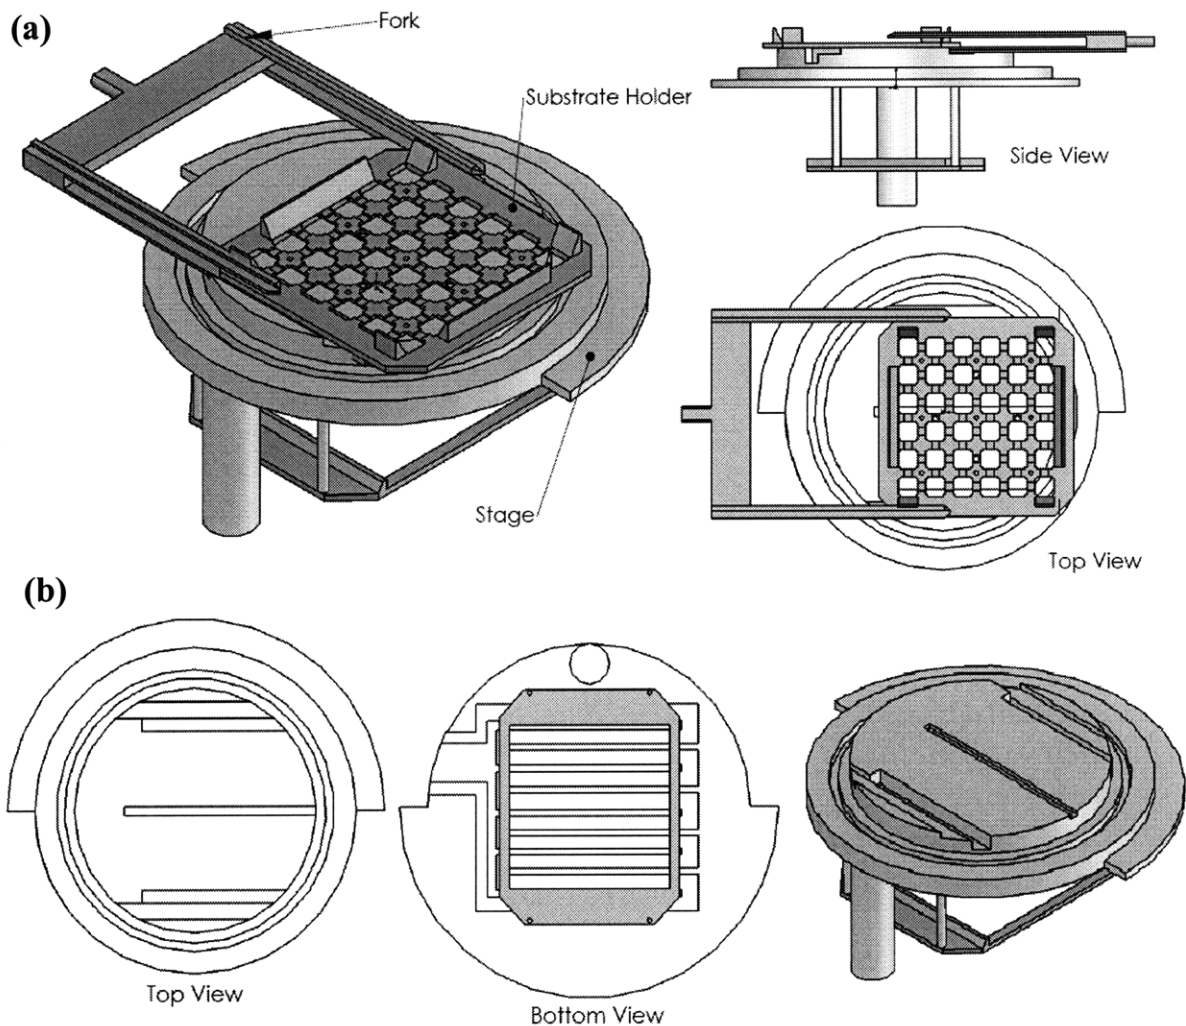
Schematic drawing of sample holder alignment onto the stage: (a) upper part and (b) bottom part of iCVD/oCVD system.
